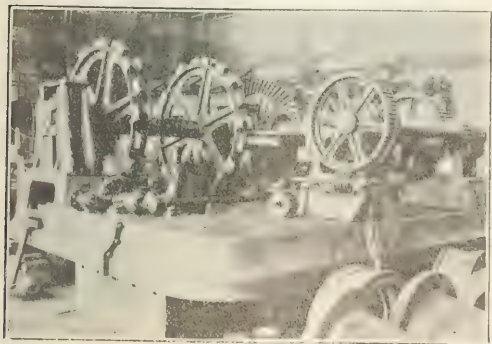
ASSEMBLY OF DRIVING MECHANISM OF BUCKET LIFT
